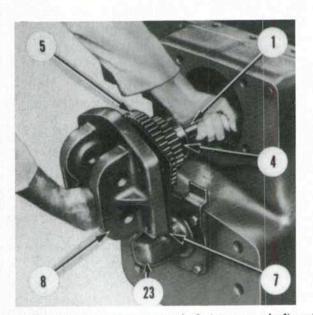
View showing removal of pto upper shaft and drive gear assembly.
